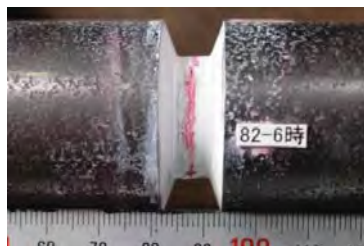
Appearance of 1<sup>st</sup> bead surface of restraint welded joint with ERNiCr-3 filler wire after penetration test.
